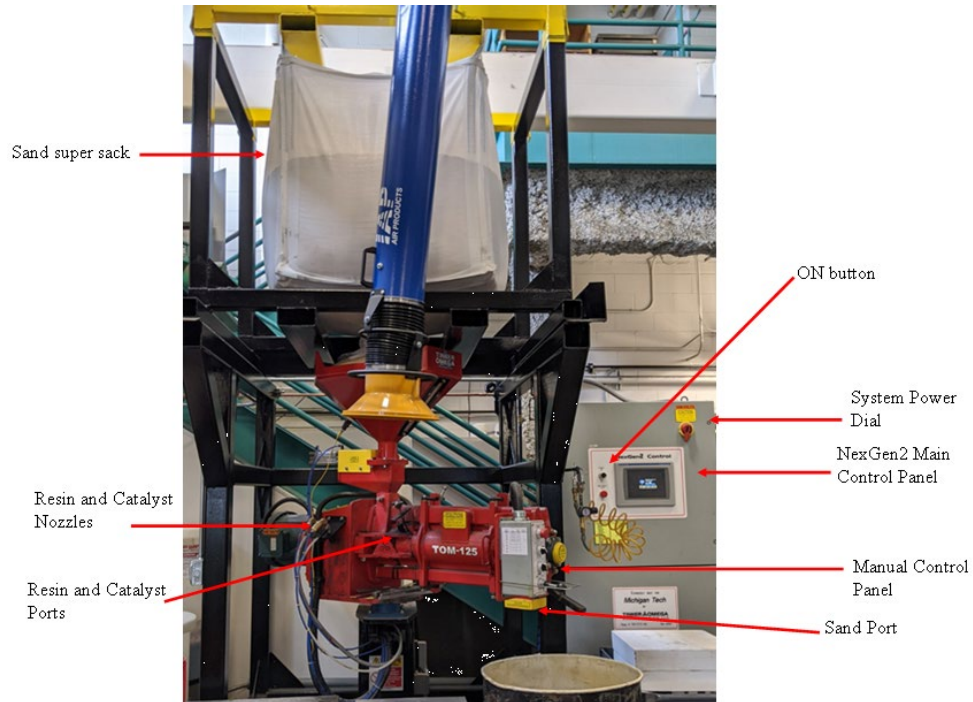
Tinker Omega TOM-125 Chemically Bonded Sand Molding setup
